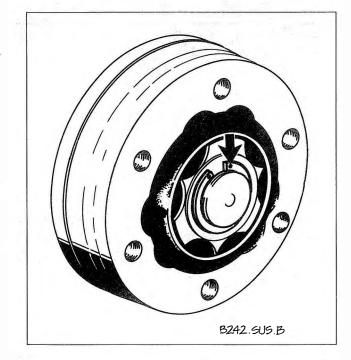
Circlip (arrow) securing inner CV joint to axle shaft. Always replace.
